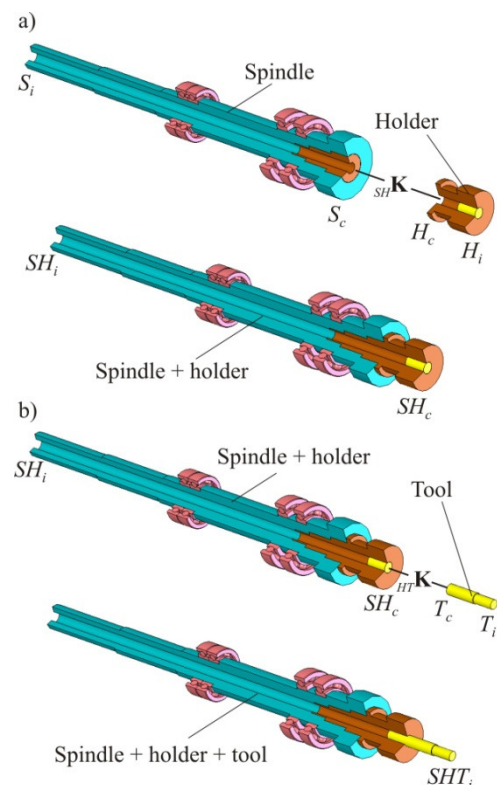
Elastic coupling of the spindle–holder system (a) and elastic coupling of the spindle–holder–tool system (b)
